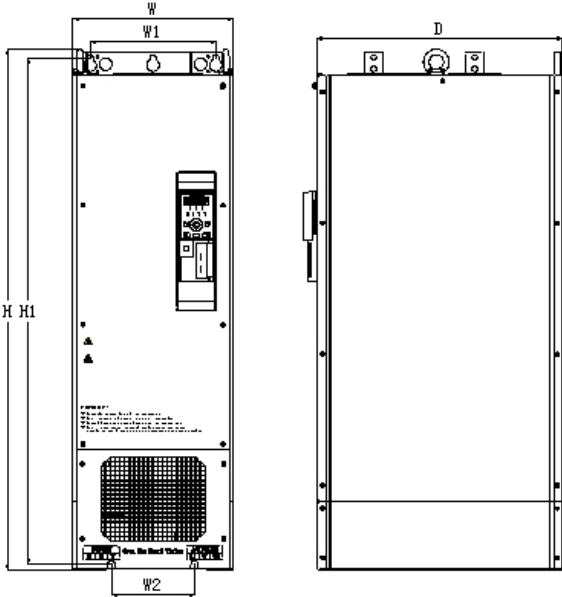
IMD224U43E~IMD404U43E installation dimensions
